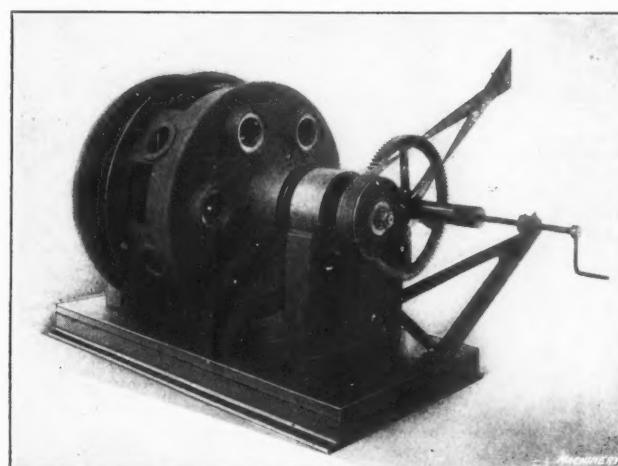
Opposite End of Fixture showing Drive and Feed Mechanism
